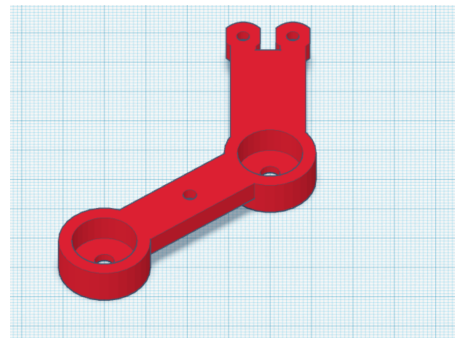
Bottom double holder, holds first and second lower brushes.
